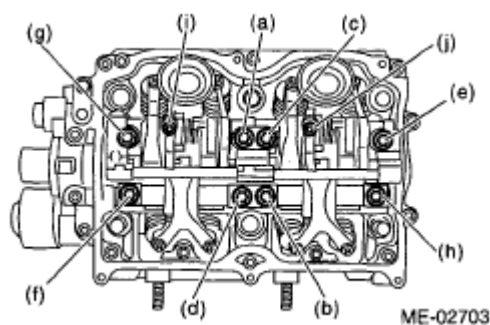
Identifying Valve Rocker Assembly Bolt Tightening Sequence
